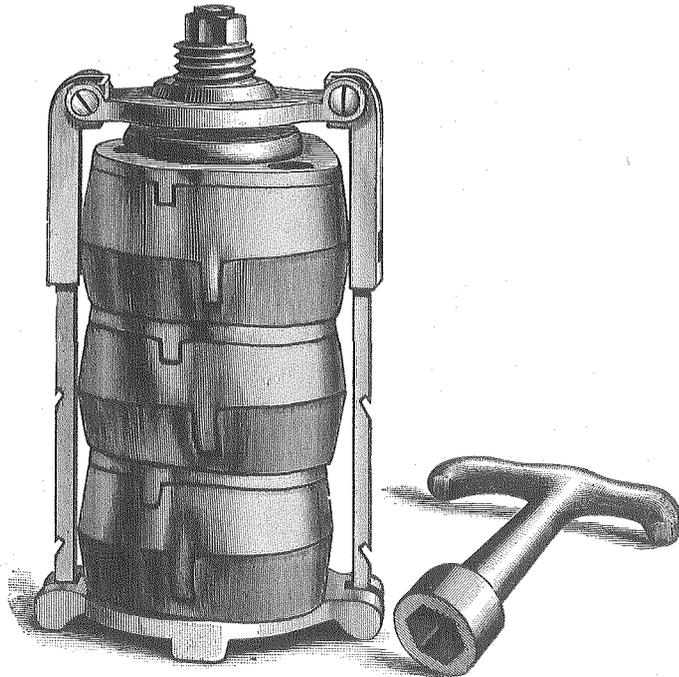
Adjustable Automatic Flask Closing Spring Press for One, Two or Three Flasks
